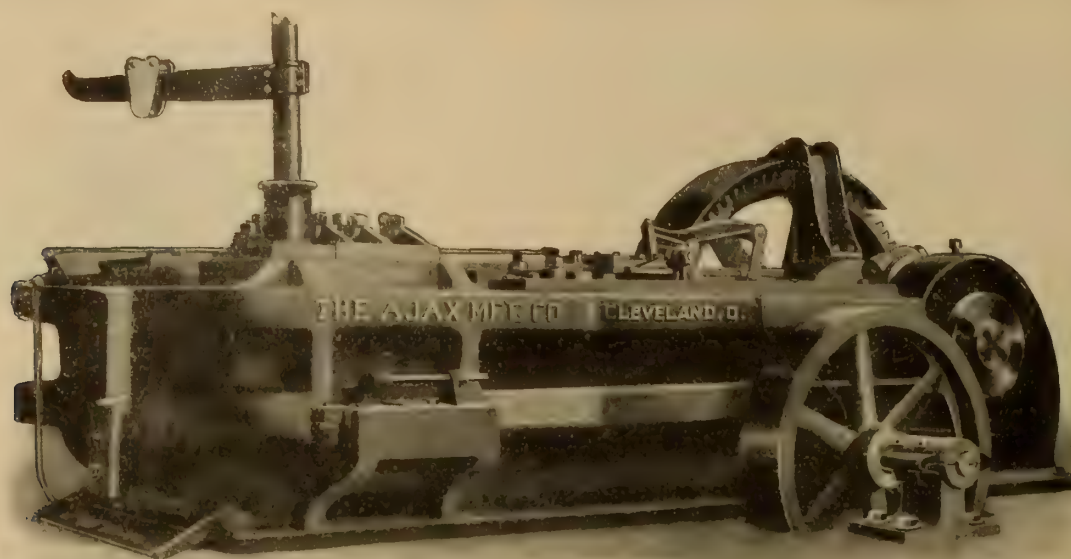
AJAX FORGING AND UPSETTING MACHINE.
